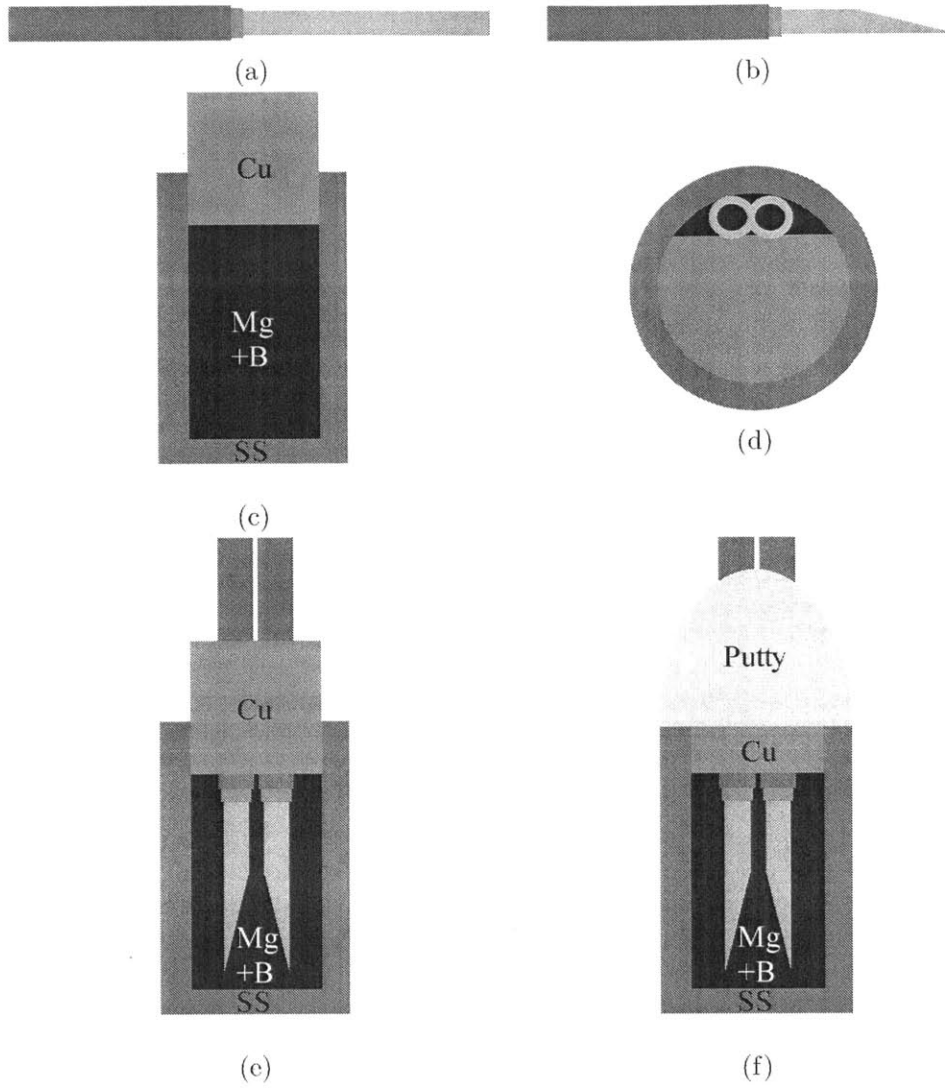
Schematic drawings of splicing process. (a) etch wire; (b) shear wire; (c) fill powder; (d) insert wires; (e) align wires; (f) seal joint.
